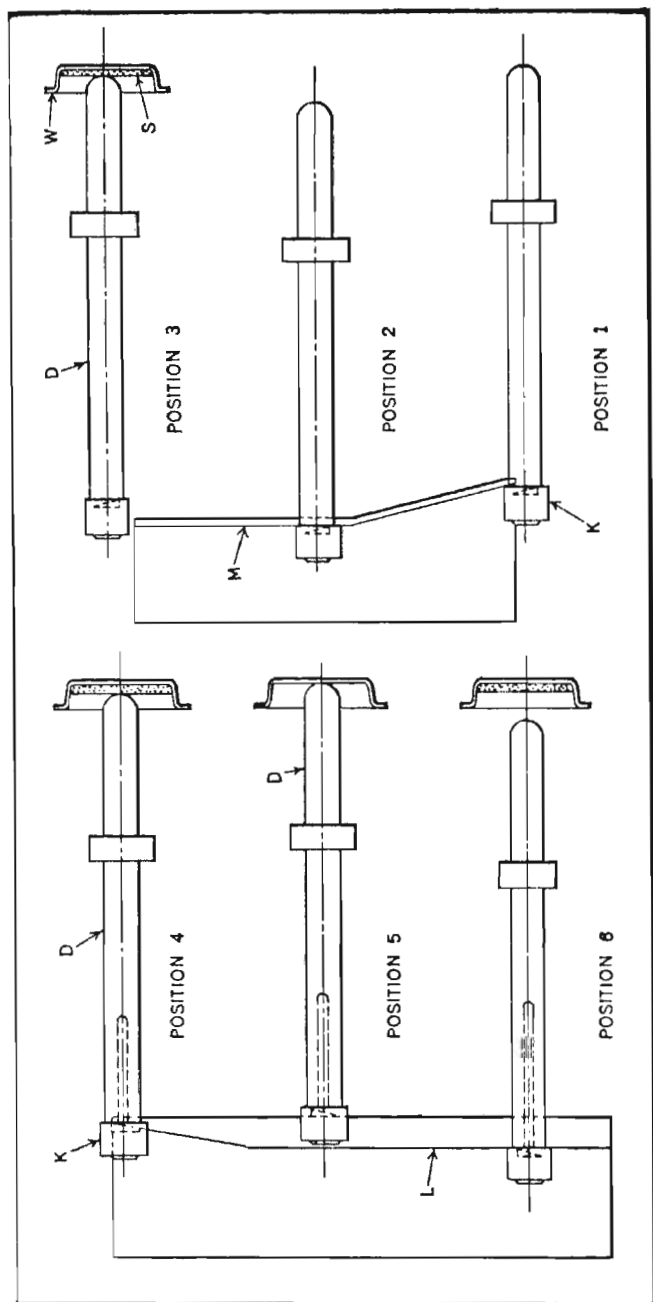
Diagrams Illustrating Principle Employed in Mechanism for Removing Caps *W* from Machine when the Feeding Device Falls to Supply Them with Cork Disks *S*.
